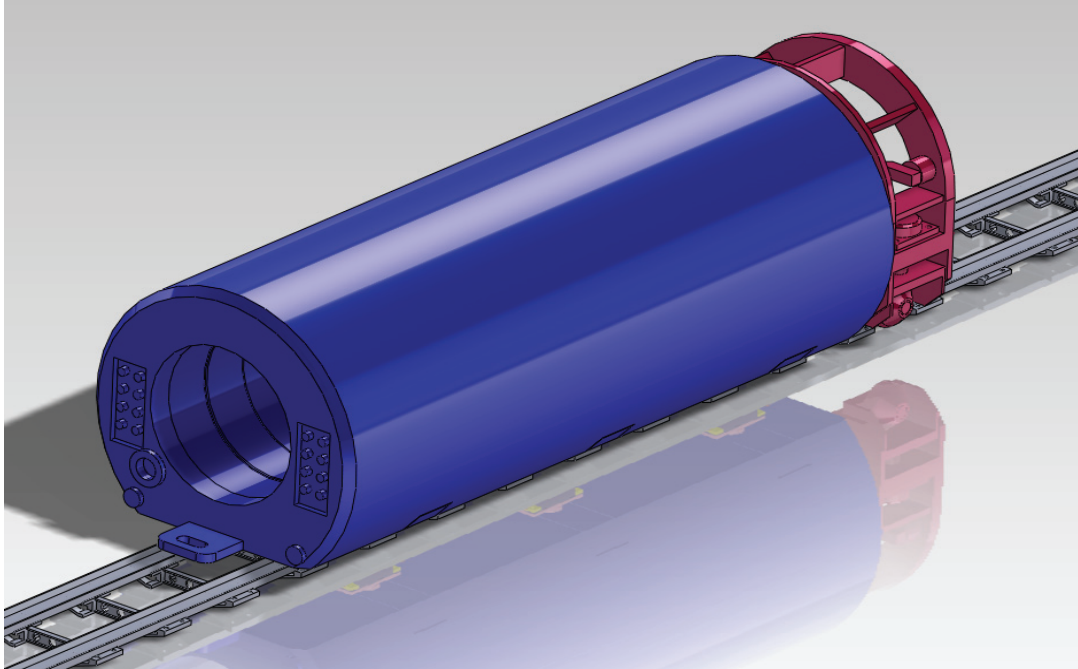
Container Retrieval Machine with shielding door open and Advance Frame retracted into the Guide Cylinder.
